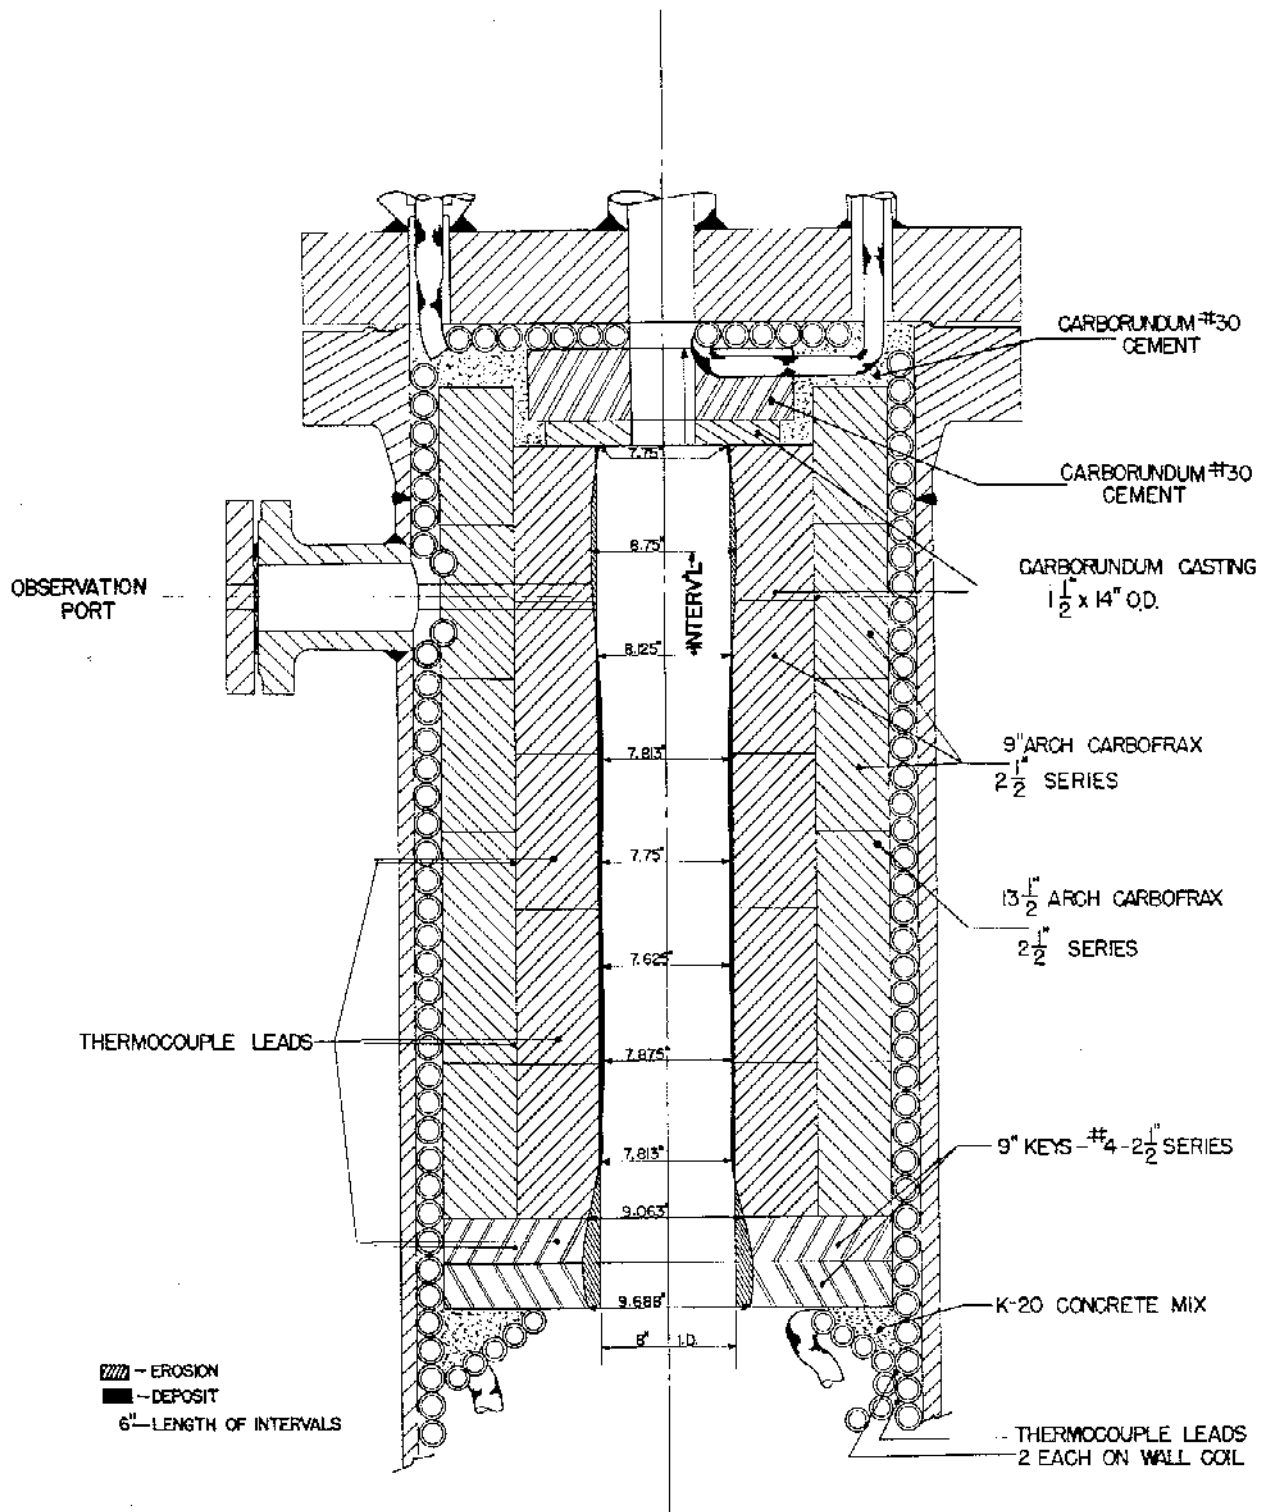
Cross-section view of pressure gasifier, showing refractory condition after run P-22
